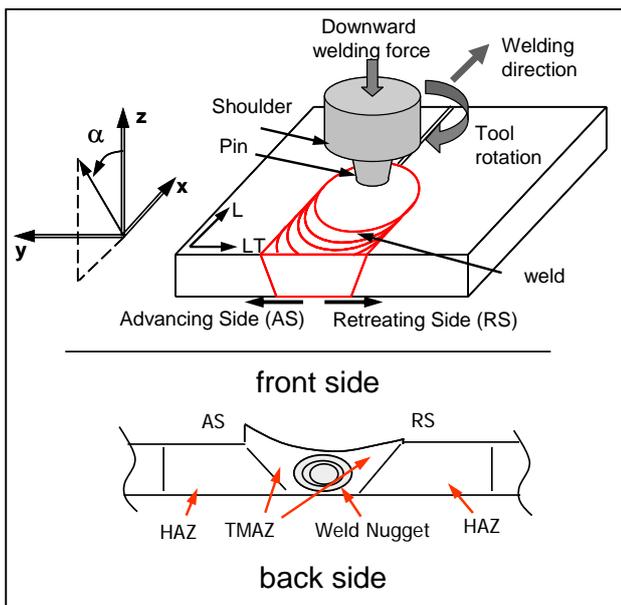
FS weld tool, definition of axes and weld zones
